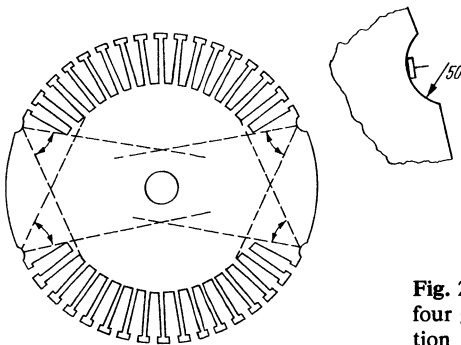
Section through generator rotor with four grooves for inspecting the internal cross-section
